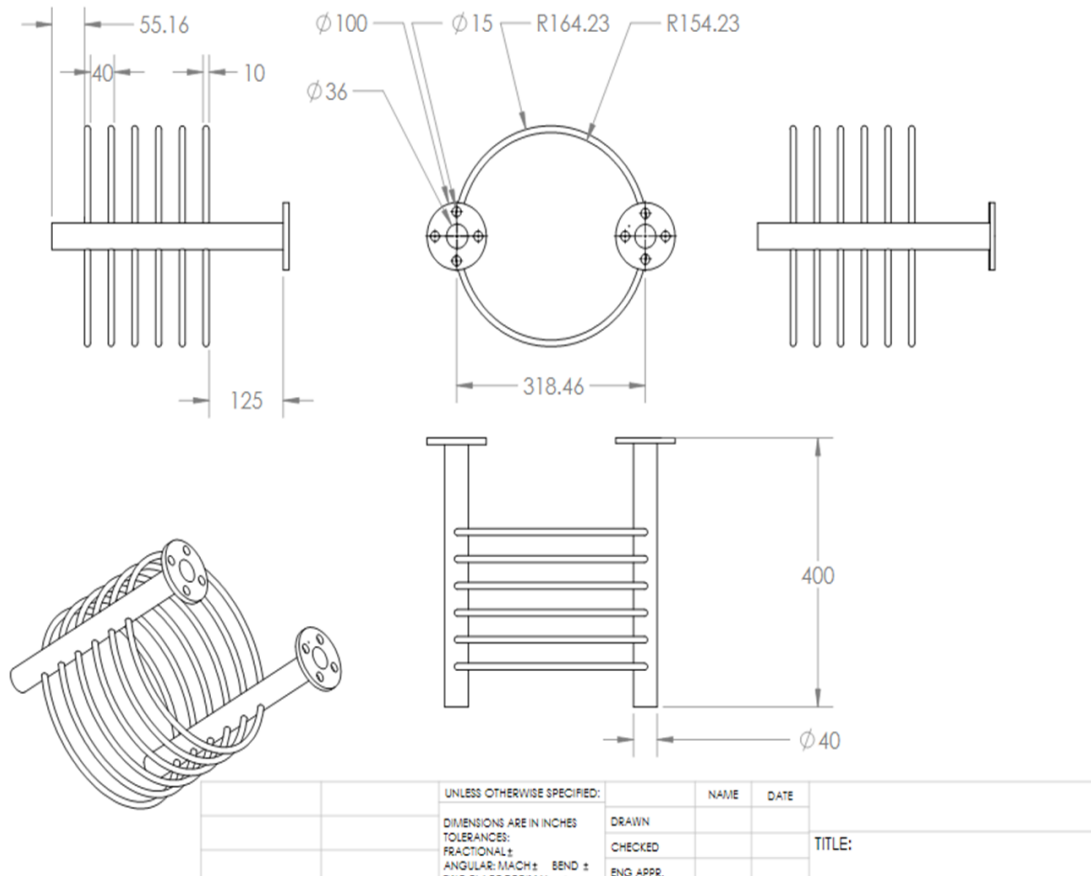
Details of the shell and tube heat exchanger in the chiller
